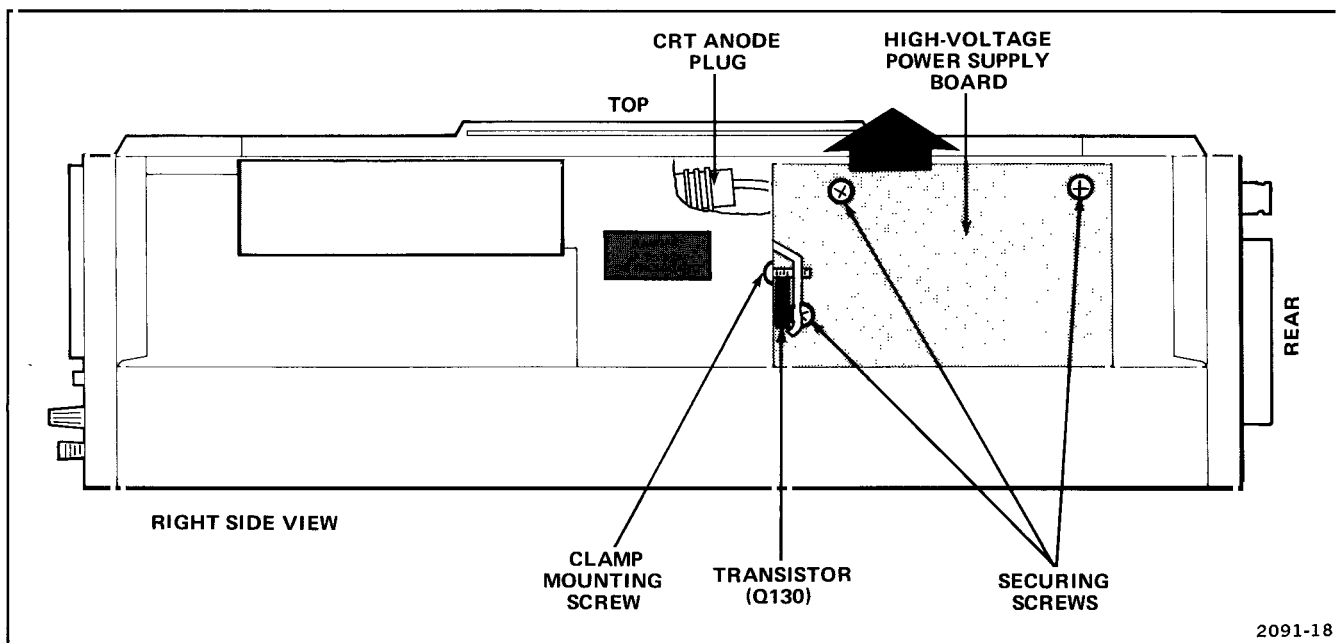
A3—High-Voltage Power Supply board removal and replacement.
